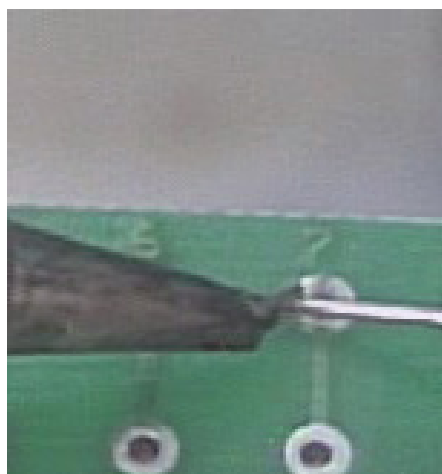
Close-up image of the ISS Solder Kit soldering iron tip. The bent section of the tip is in contact with the solder wire, component lead, and circuit board land.
